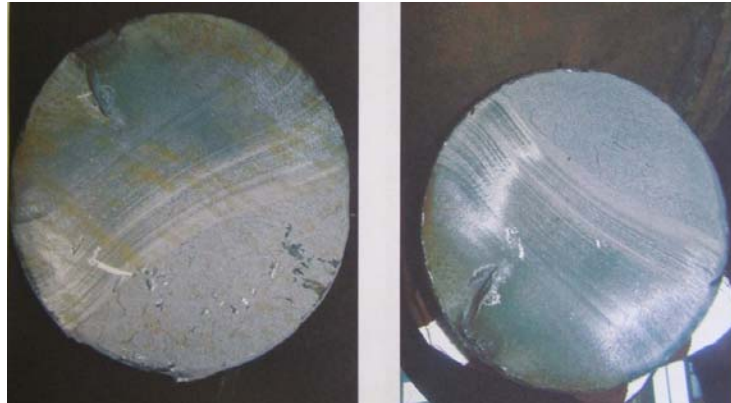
Fracture plane of the part, which is stored with the use of special protective coatings.
